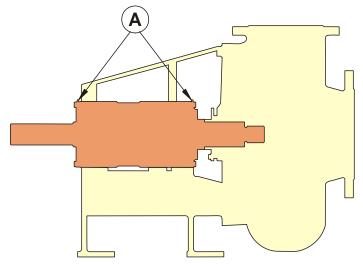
Lubrication point diagram- Bearing greasing points (A)
